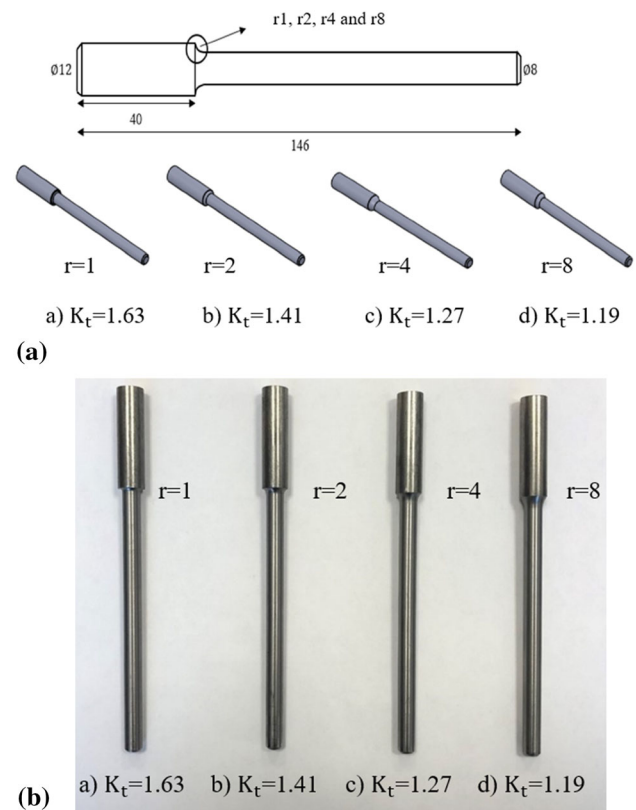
The detailed specimen geometry used in rotating bending fatigue tests: (a) notch geometries and (b) manufactured specimens
